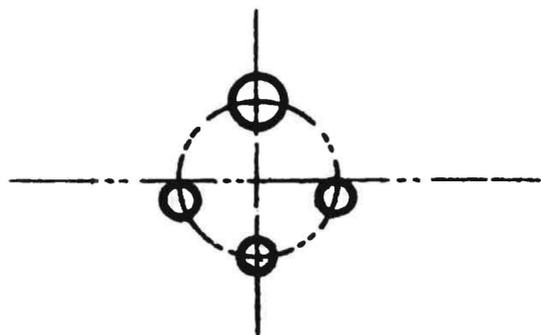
Template for drilling holes in base of tube socket. If you cut this out and paste it on the hard rubber there need be no fear of going wrong, as it is exactly right and will save measuring.
